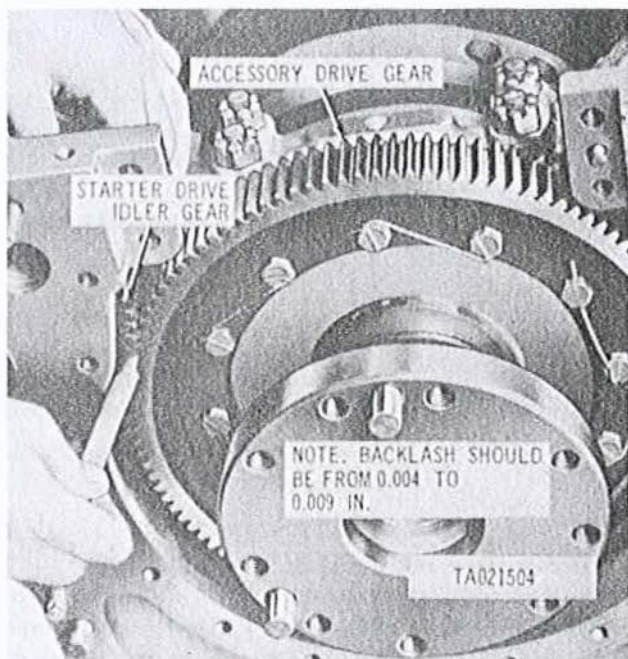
Checking accessory drive gear and starter idler gear backlash.
